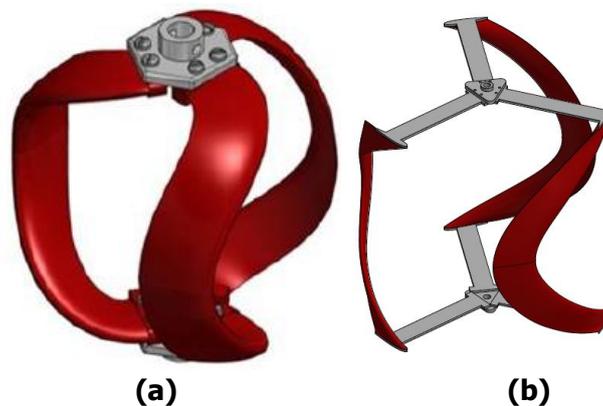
Inventor drawings of the two prototypes tested. (a) Spherical turbine blades (Turbine A); and (b) Cylindrical turbine blades (Turbine B).
